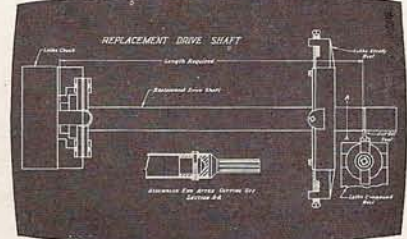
Cutting Off a Drive Shaft Before Installing Replacement Universal Joint.
